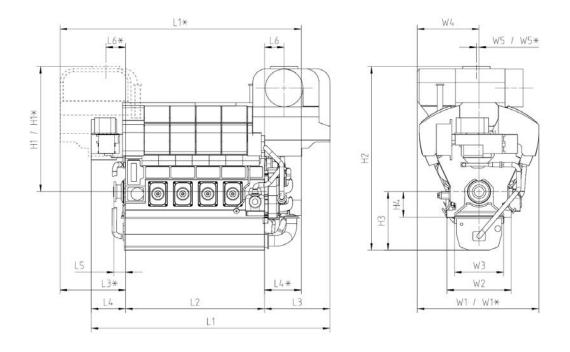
W8V31 & W10V31 Main engine dimensions
